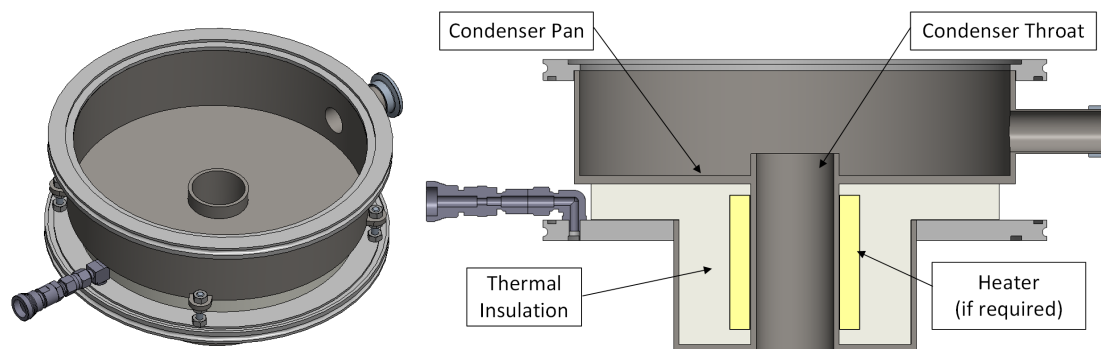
Condenser Bottom – (left) isometric view and (right) section view.
